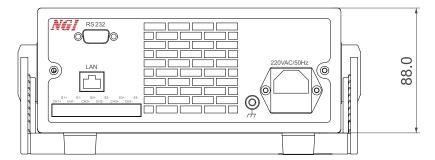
Rear Panel Dimension(mm) (N341X/N341XE Series)
